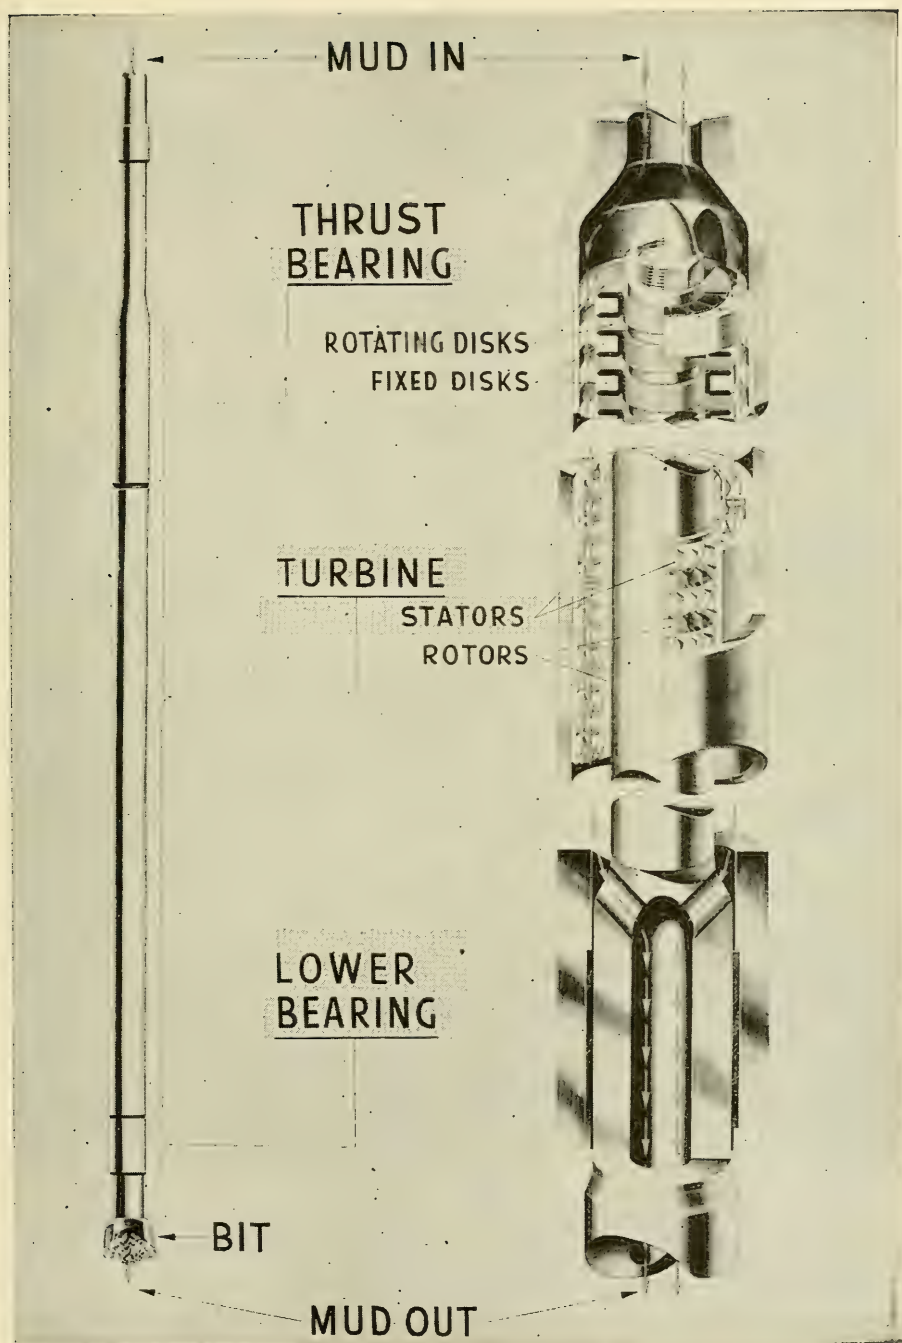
Complete turbodrill (left) and cutaway view (right) showing major components.
